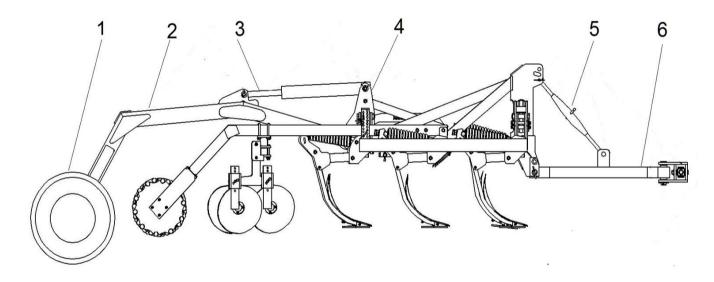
Construction of the TOP cultivator transport carriage: 1- axle with wheels, 2- carriage frame, 3-cylinder with hydraulic system (fig. 13), 4- frame holder, 5- turnbuckle, 6- drawbar.
